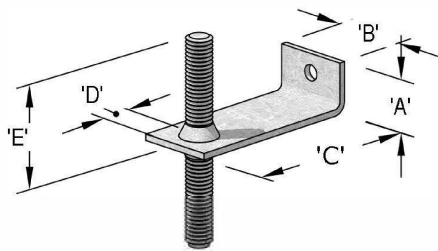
'Z' & 'J' STRAP ANCHOR @ HEADER
